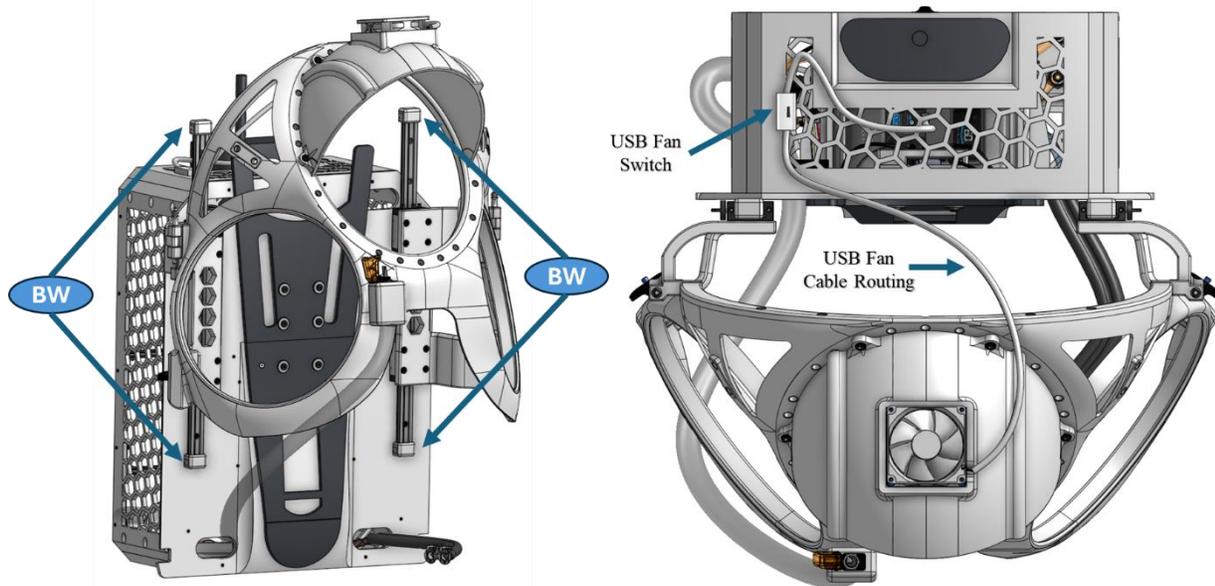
Rail End Caps and USB Fan Cable Routing.
